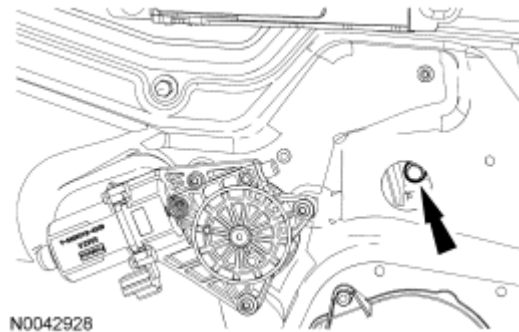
Locating A-Pillar Front Door Window Glass Clamp Bolt
